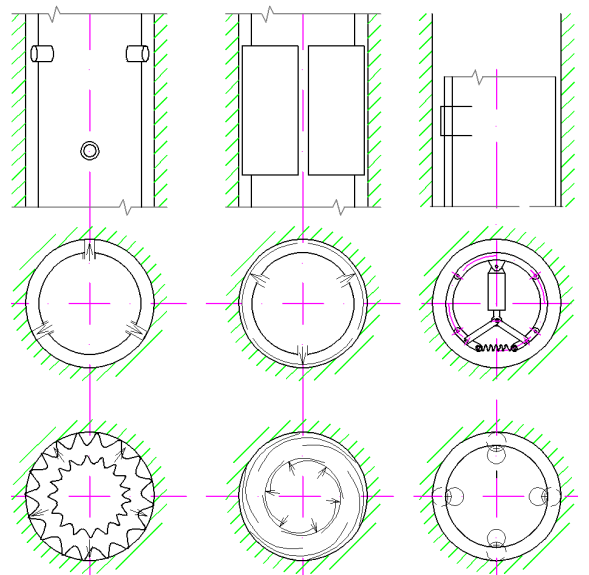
Plasmabit last is being transferred to bore wall via shape
